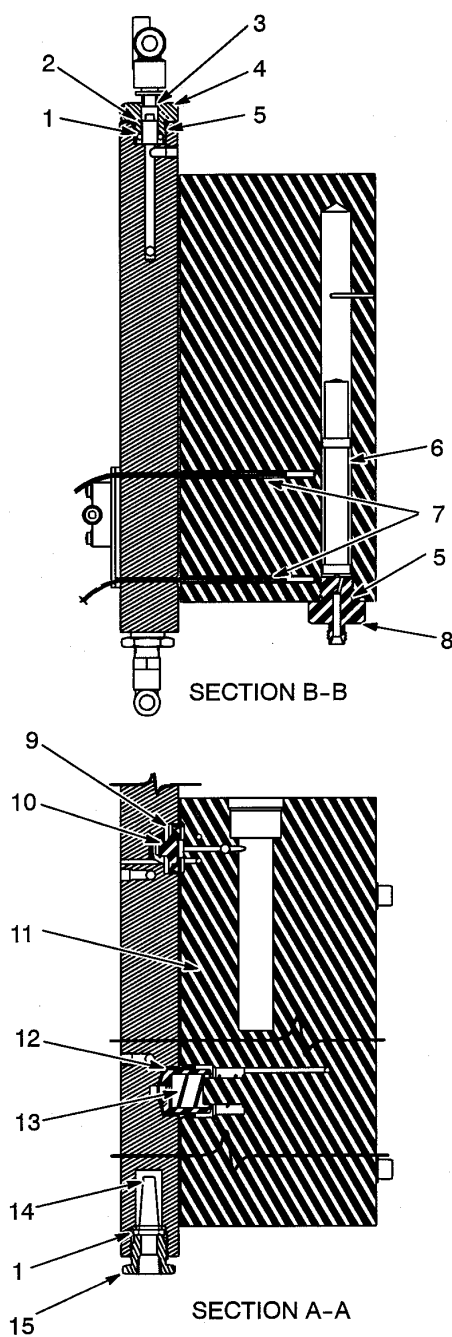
Ink Module/Manifold Assembly, Components Internal View
